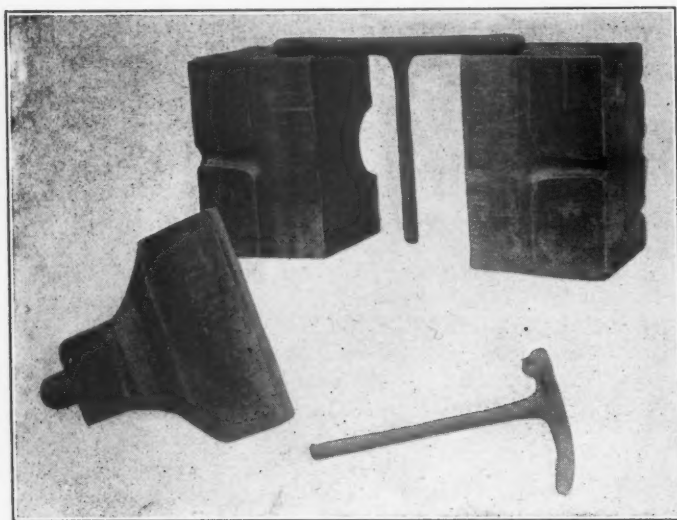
DIES AND HEADER FOR WELDING END ON CLINKER HOOK.
